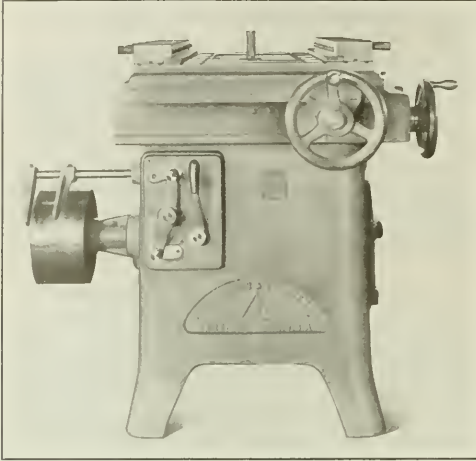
Machine for milling the Outline of Blanking and Trimming Dies, which has been redesigned by the Billings & Spencer Co.
